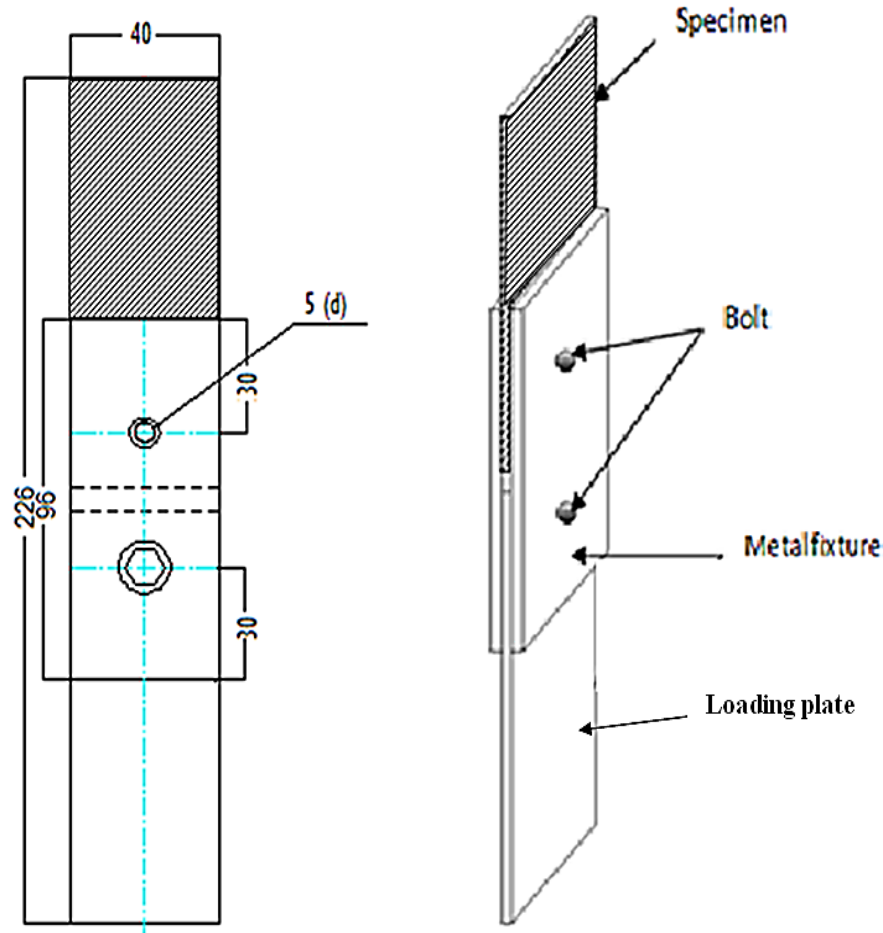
Testing setup of bolted joint specimens with dimensions in mm.
